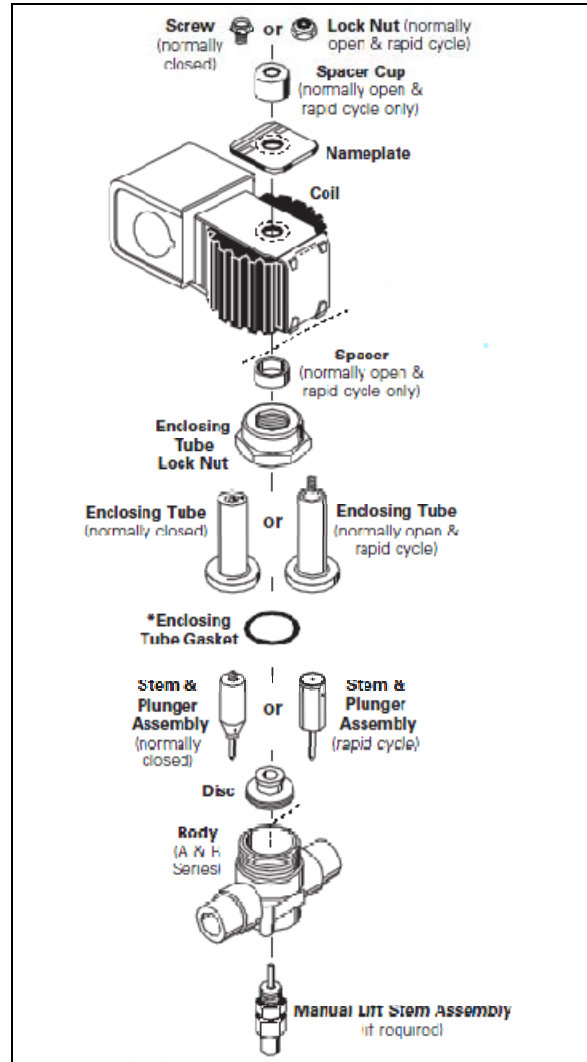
TYPICAL REFRIGERANT SOLENOID VALVE 22044
